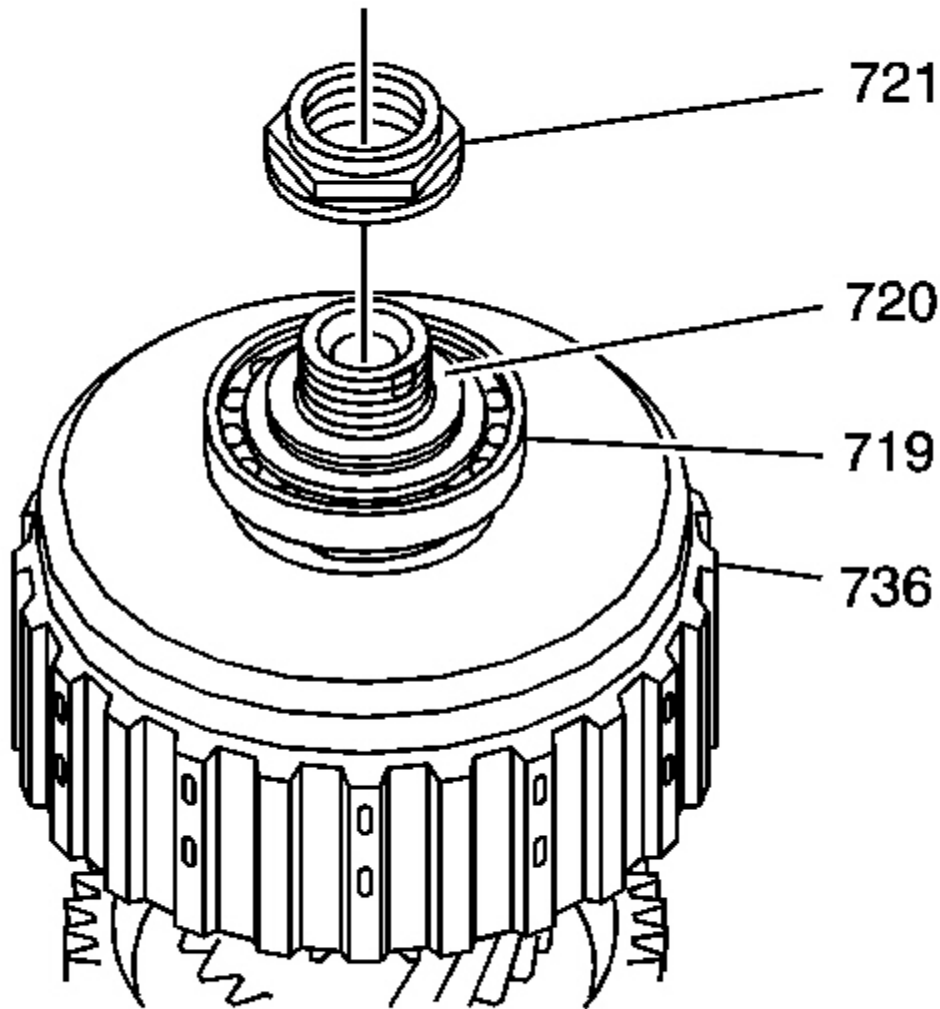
1st And 2nd Clutch Shaft Retaining Nut & 26 mm
